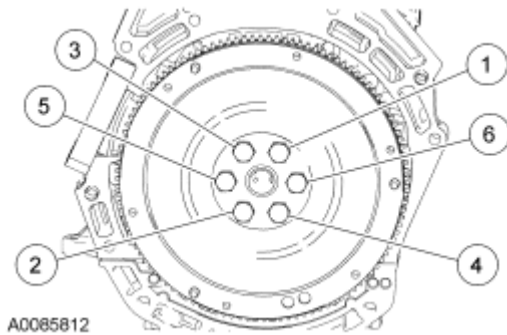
Identifying Flexplate Bolts Tightening Sequence
